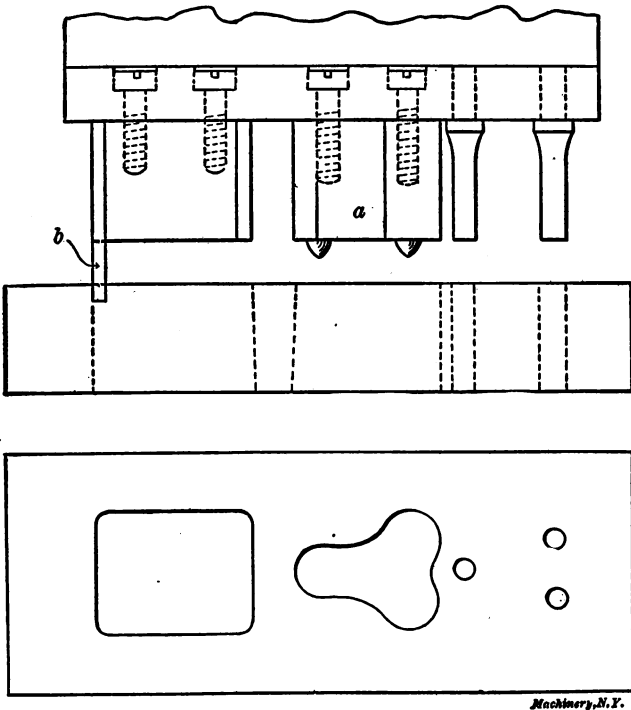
Gang Punch Arranged to Use Sheet Stock.
